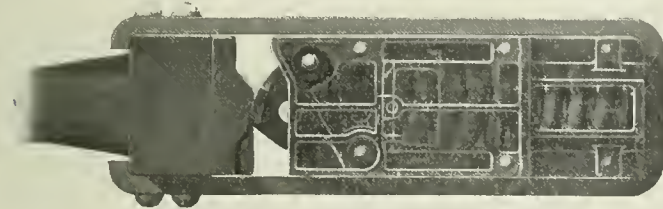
McCord Draft Gear Showing Position of Lever and Spring When Under no Load.
